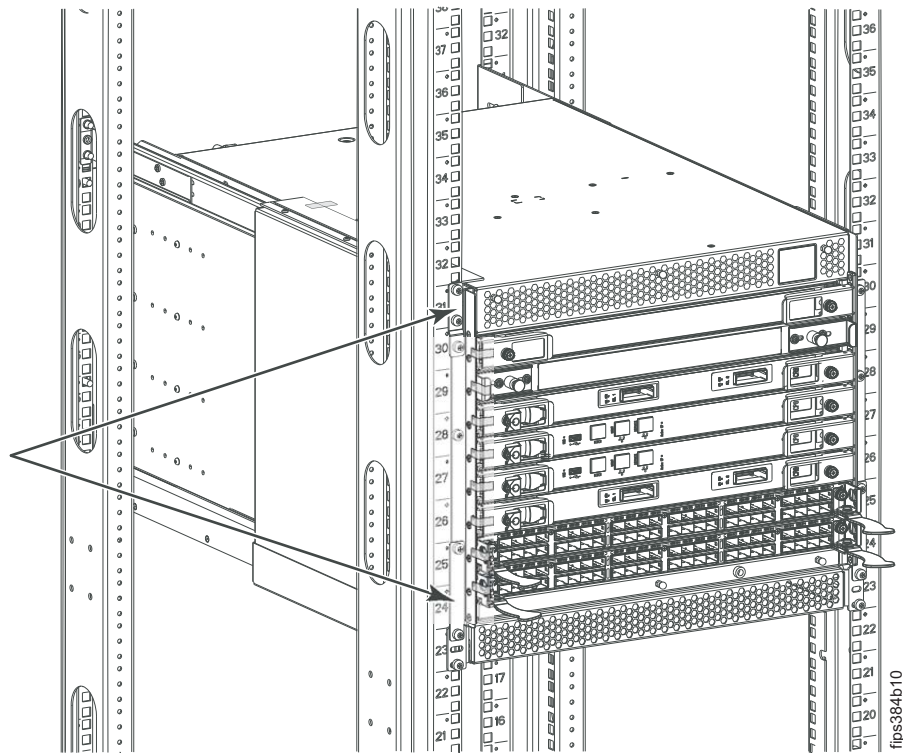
Upper and lower 2499-192 rackmount FIPS brackets installed on the left cabinet rail (left port view)
